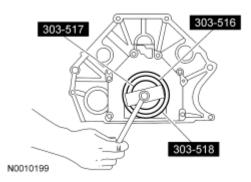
Using Special Tools To Install New Crankshaft Rear Seal Courtesy of FORD MOTOR CO.
